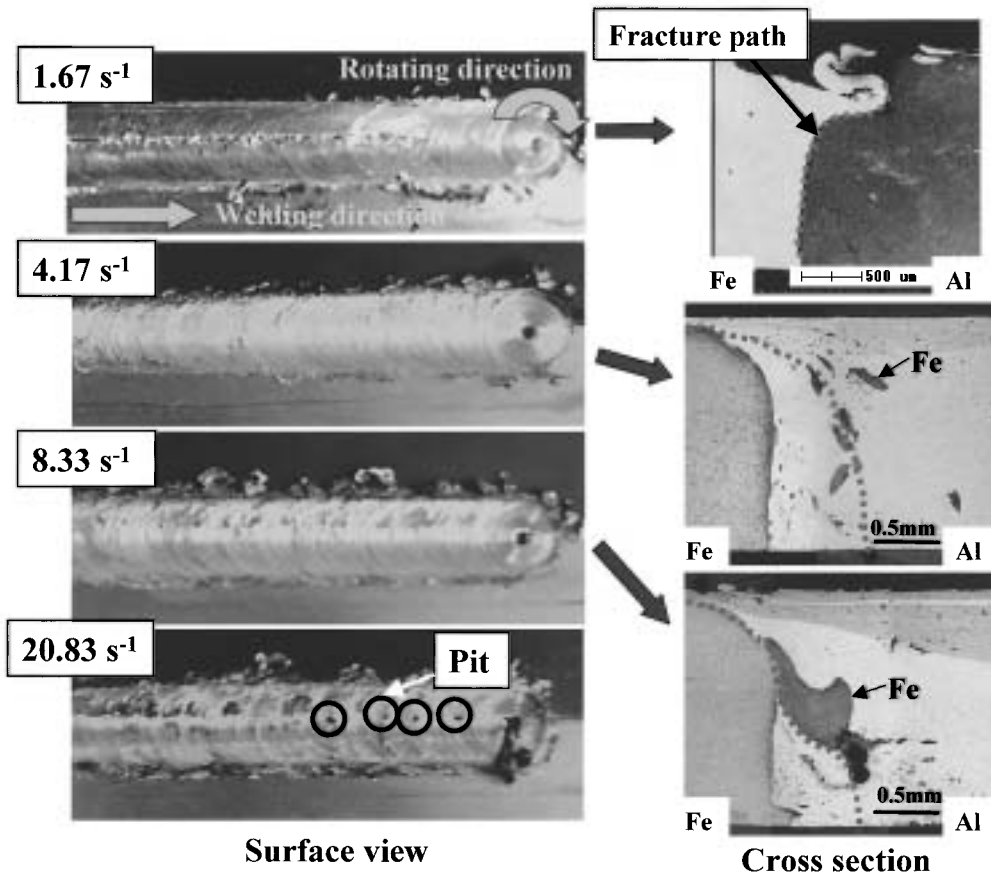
Effects of a pin rotation speed on the surface view, cross sectional structure and fracture path of welds.
